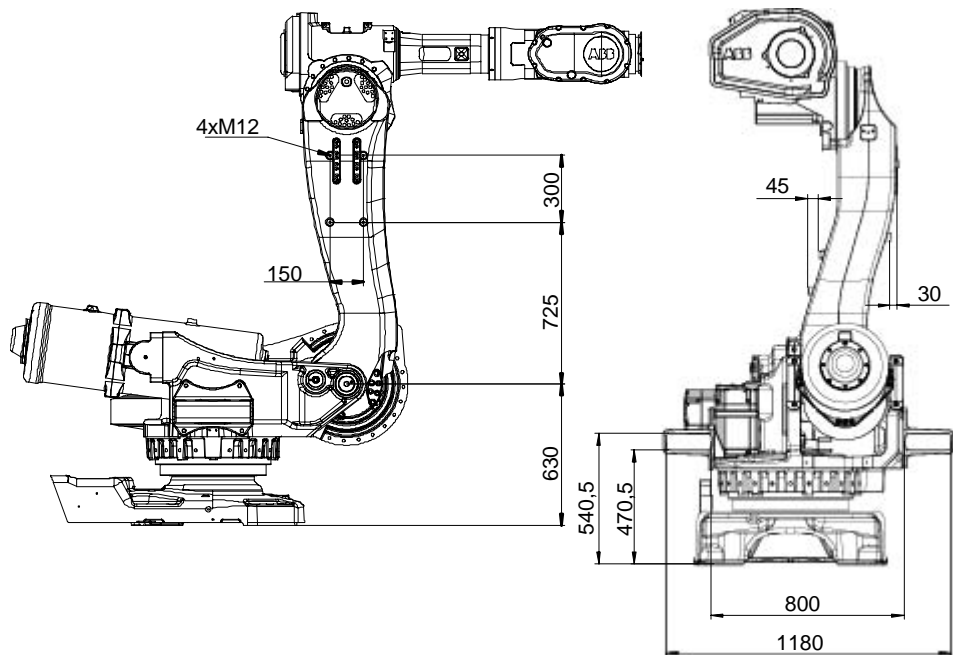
Holes for mounting extra load on upper arm on IRB 6650S (dimensions in mm).
